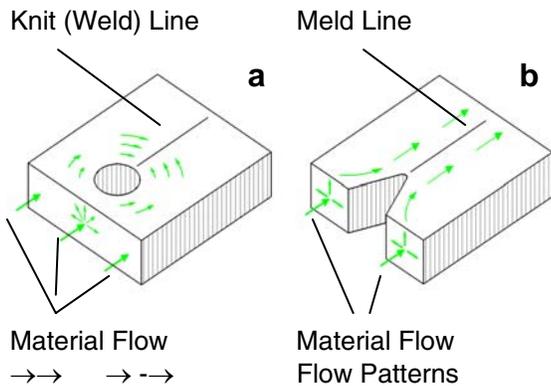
Principles in formation of knit (weld) and meld line and weld & meld flow paths: a – flow around cylindrical hole; b – flow around ribs or long insert.
